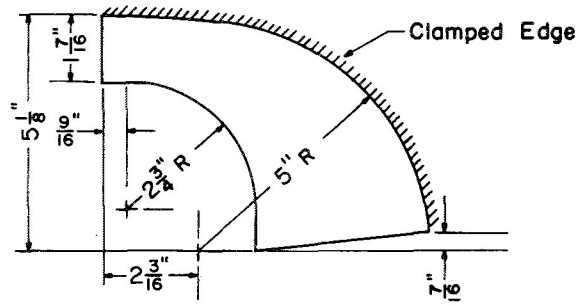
Dimensions of a flat-plate model of an impeller blade; R , radius. (After ref. 8.9)
